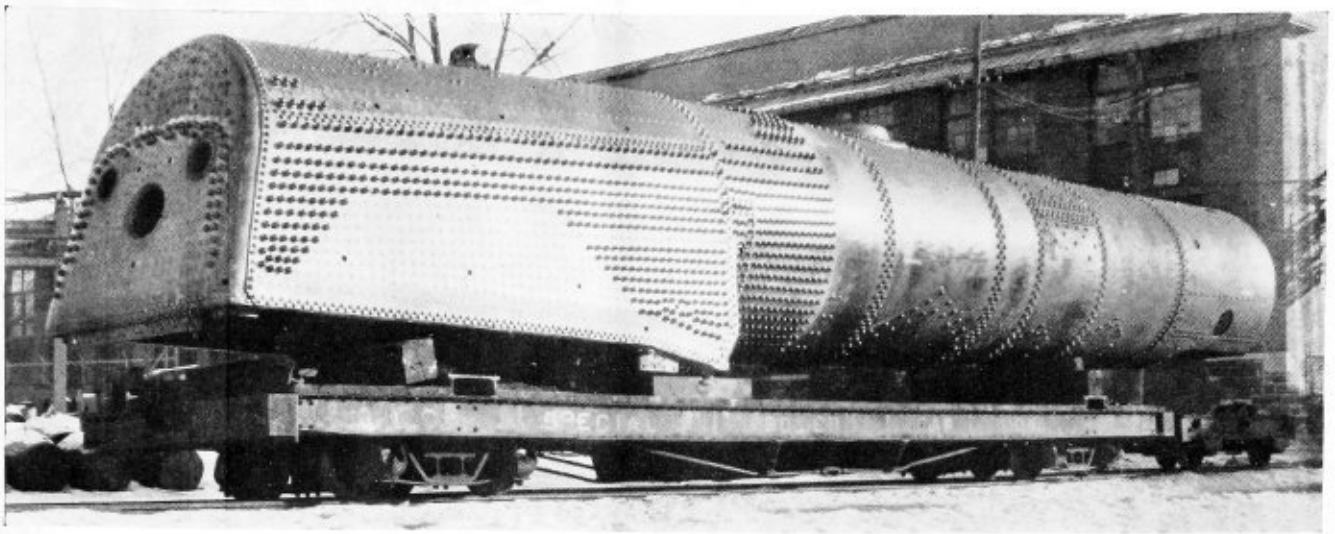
Locomotive boiler as completed in the boiler shop, before test
